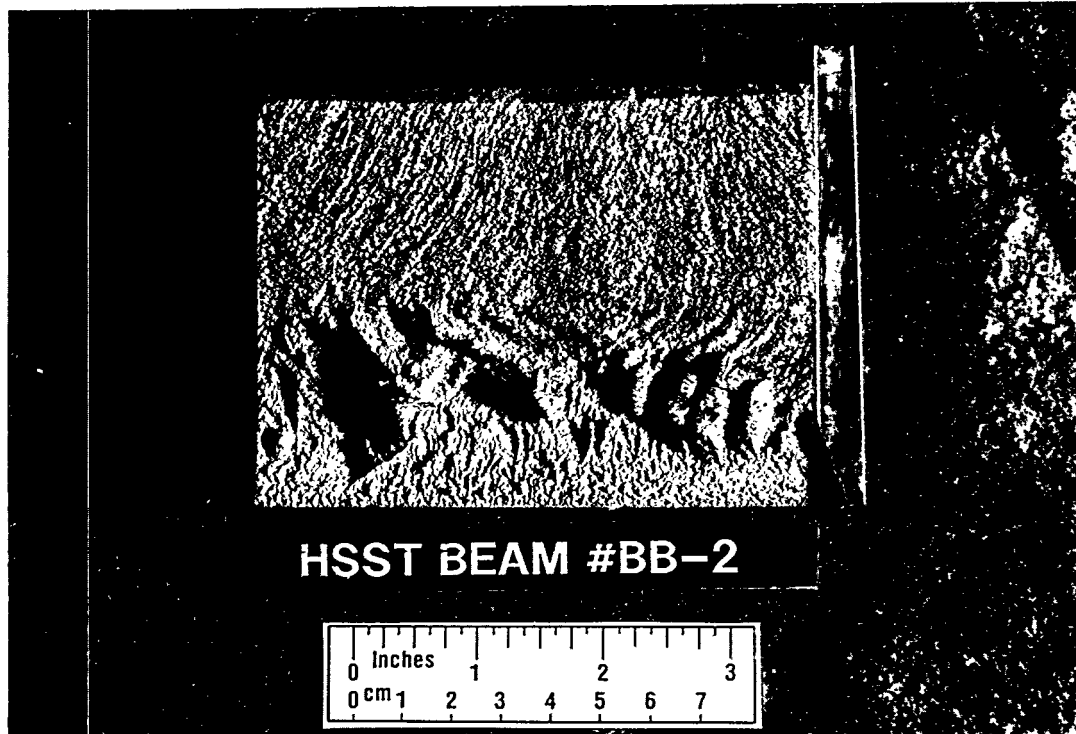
Fracture surface for shallow-flaw cruciform specimen BB-2 with fracture initiation site indicated
